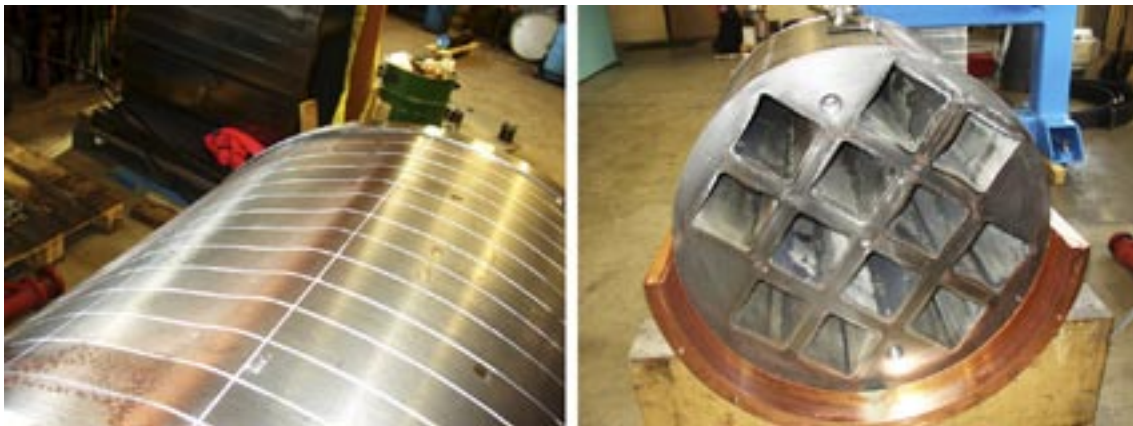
, A and B. The pictures show some local buckling of the insert. Figure B also shows that the square steel tubes that form the channels for the fuel assemblies have been deformed.
